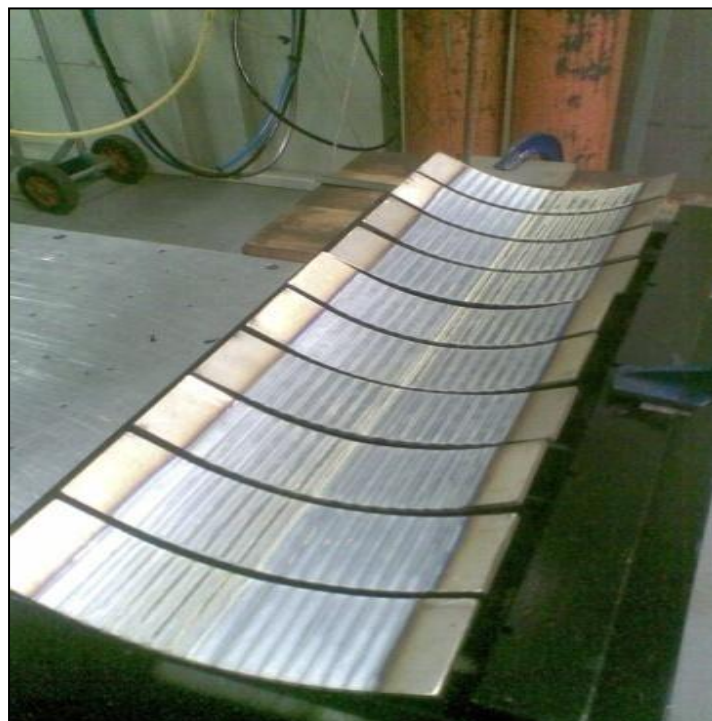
CP Ti Grade 2 specimens which were irradiated in an open mold fixture
